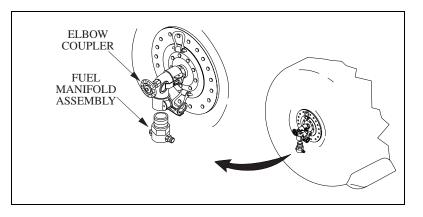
Fuel manifold assembly, with adapter, and coupler elbow valve
